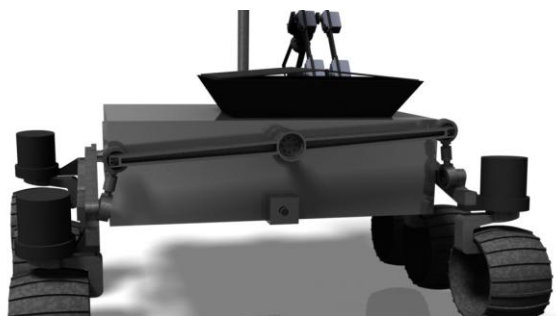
This figure showcases a CAD model of the averaging link at the rear of the rover. This allows for the chassis to maintain its initial or leveled position while overcoming obstacles. Impulses and drifting caused by rocks would be eliminated through this link by maintaining the pitching moment of the wheels
